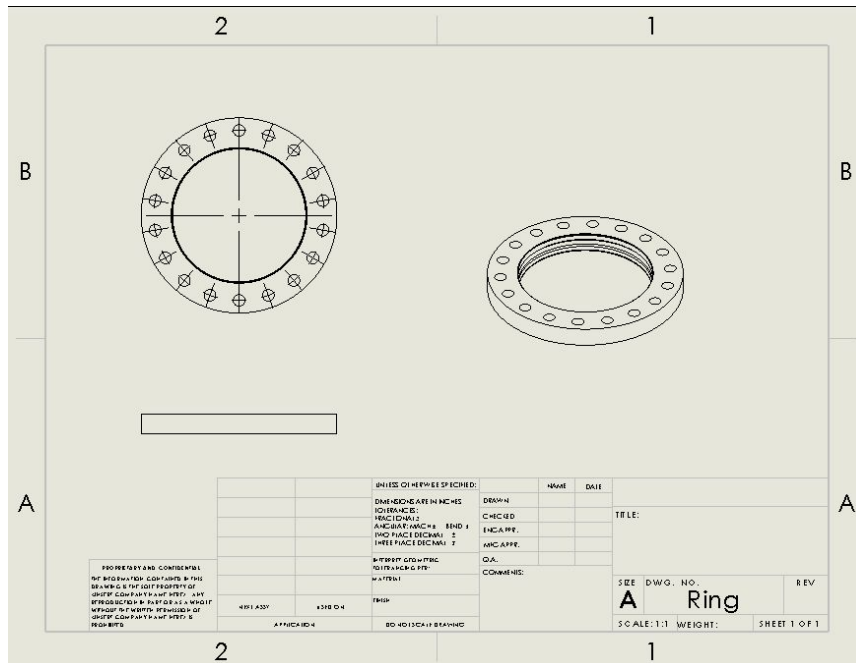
Solidworks drawing of the ring that will slide over the cap in the cap and ring design.
